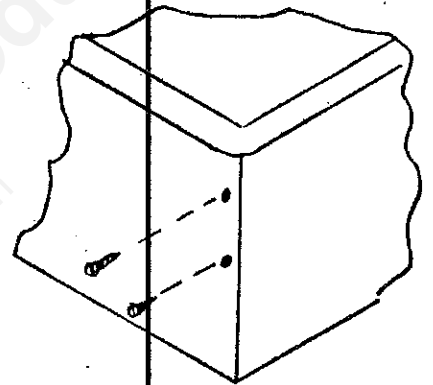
Attach braces to hood with nuts and screws removed in Fig. No. 1.
